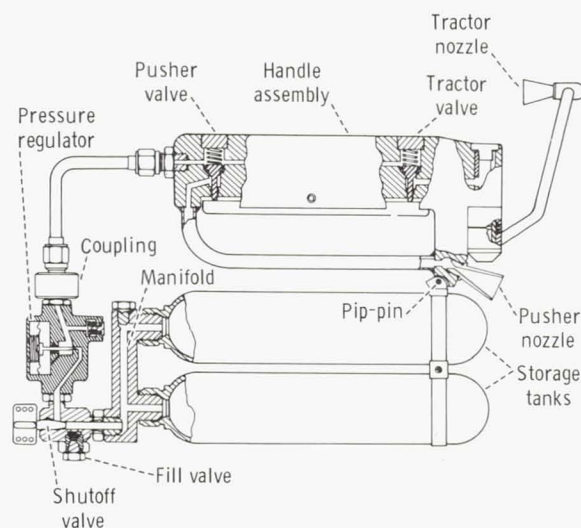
Cutaway drawing of Gemini IV Hand Held Maneuvering Unit.
